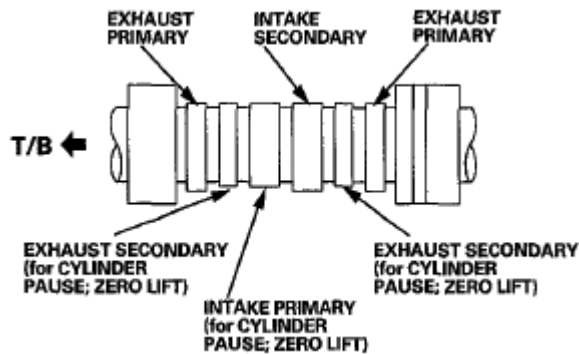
Measuring Cam Lobe Height (No. 4 Cylinder)
